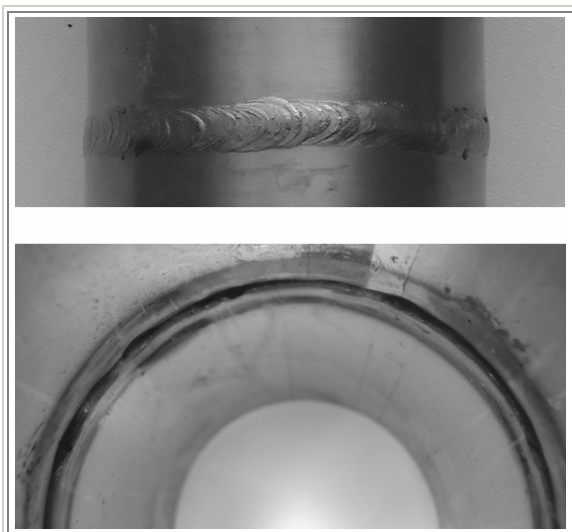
View of stainless steel X2CrNiMo17-12-2 weld
